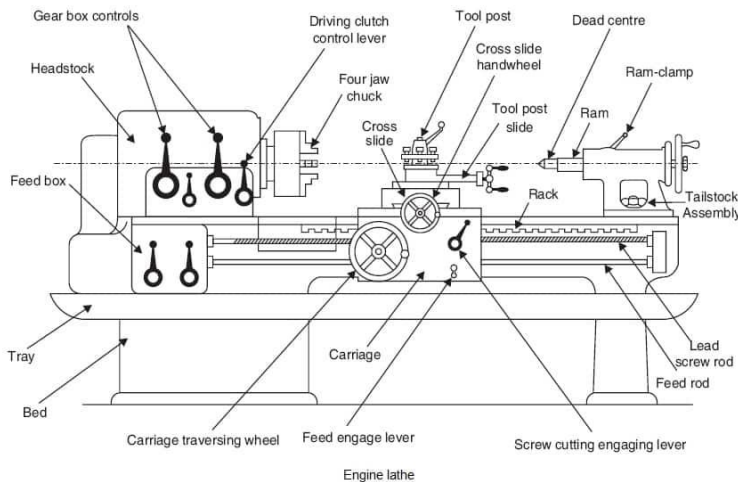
Reprising the Lathe Machine instrument [Learn Match].
